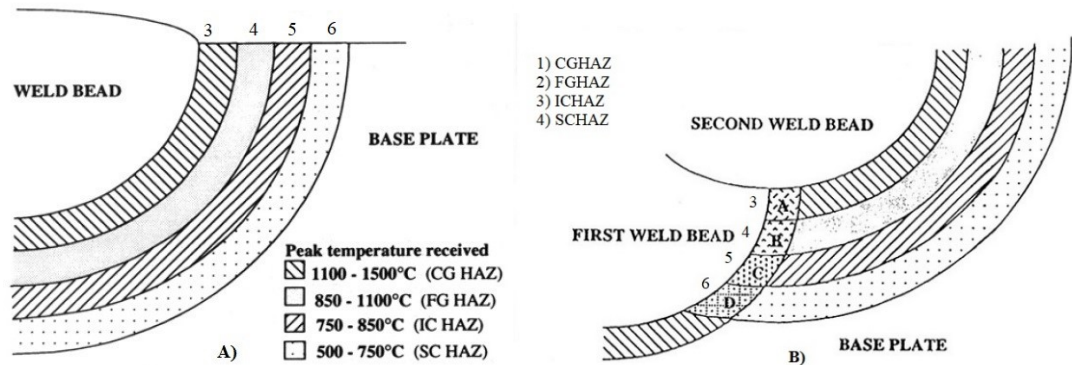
HAZ sub-zones. a) Single pass weld, b) multipass weld. [23]
